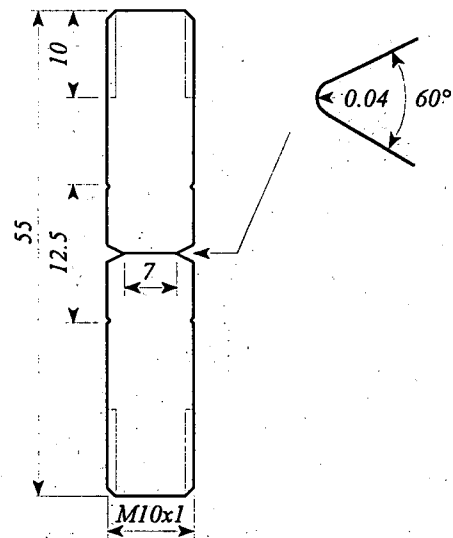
Specimen size; the threads are machined after precracking the specimen.
